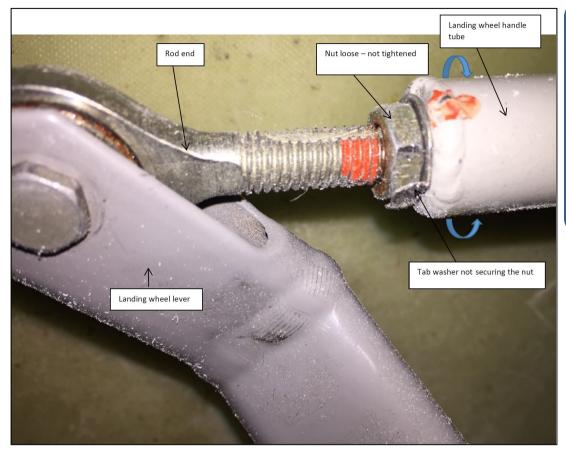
Landing wheel handle tube rod end connection to landing wheel lever with the loose nut.
